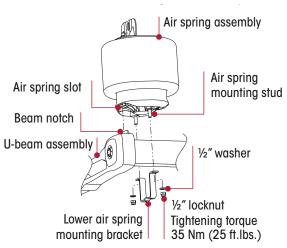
PRIMAAX EX Air Spring – Integrated End Cap
